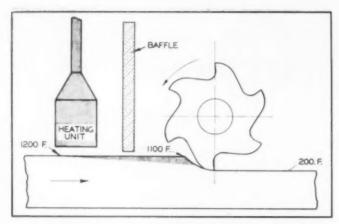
Diagram of milling setup for heating the surface of workpiece. Shaded area indicates flow of heat.
